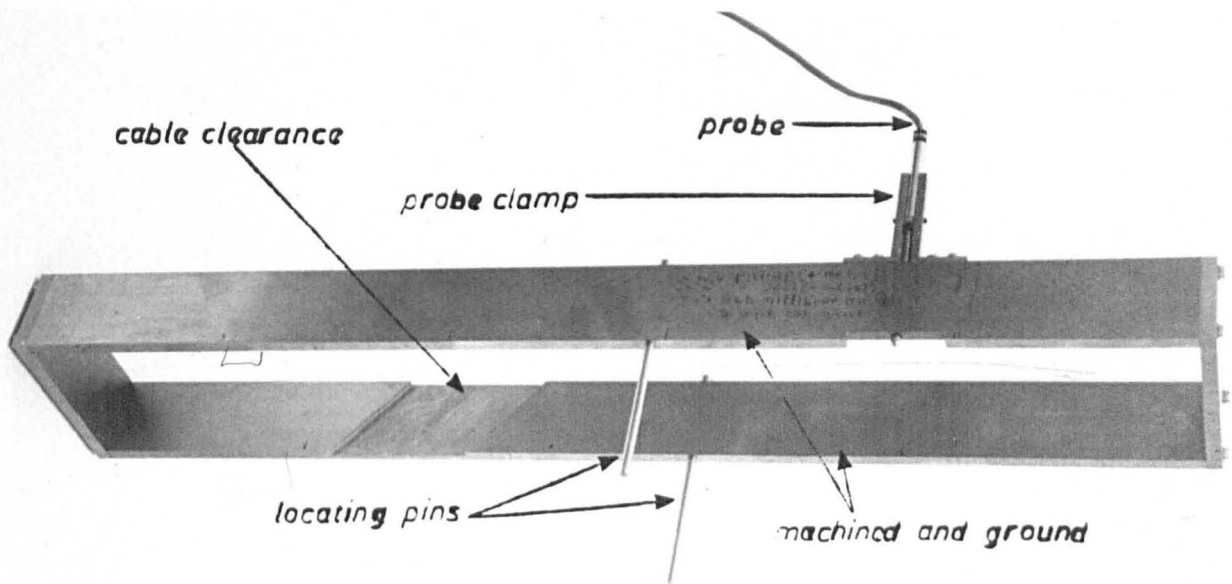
Shaft Vertical Misalignment Measurement Jig
